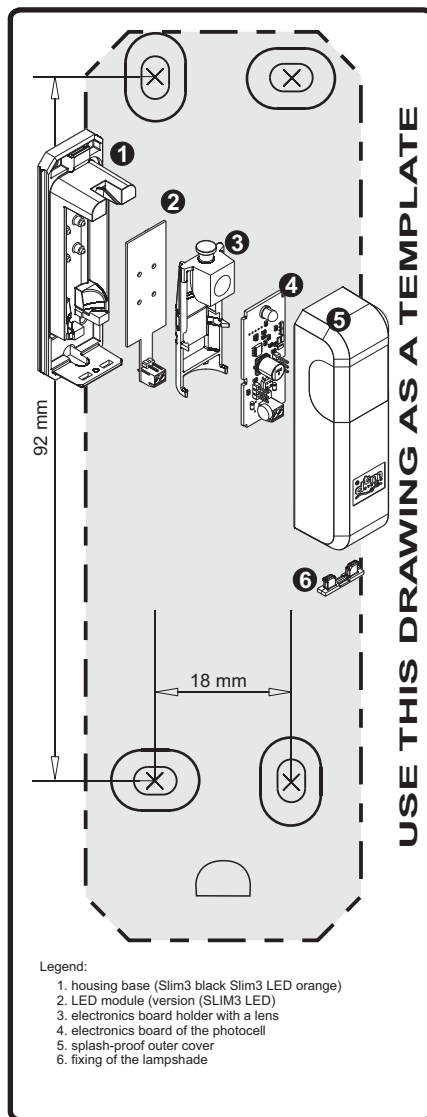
The spacing of the mounting holes in the scale 1: 1, with the assembly drawing.
